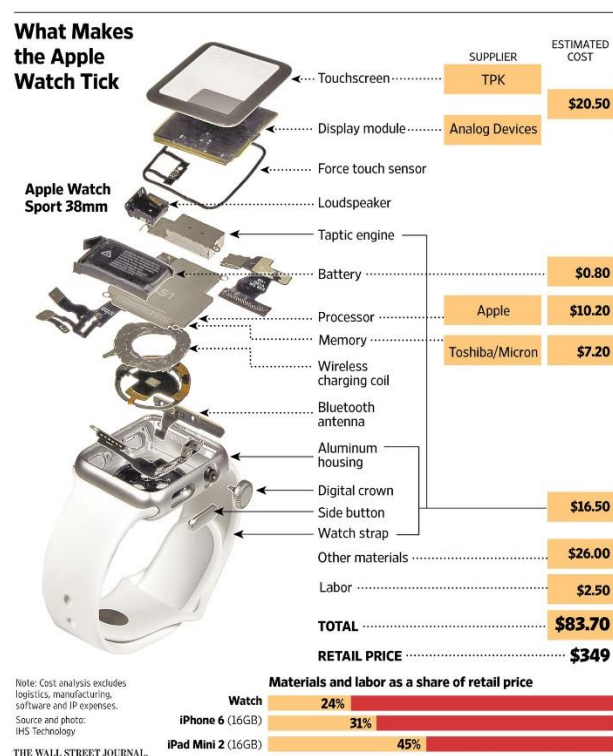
Example of an Apple Watch Sport 1st generation's exploded view [2]
